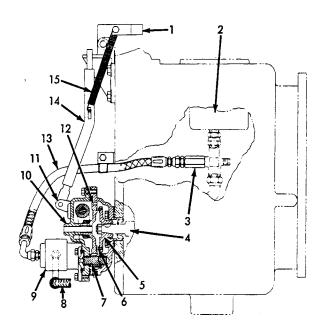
Push-Start Pump and Controls (T-32152)
